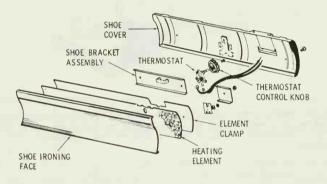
The component parts of an ironing shoe, as used on the rotary ironer.
